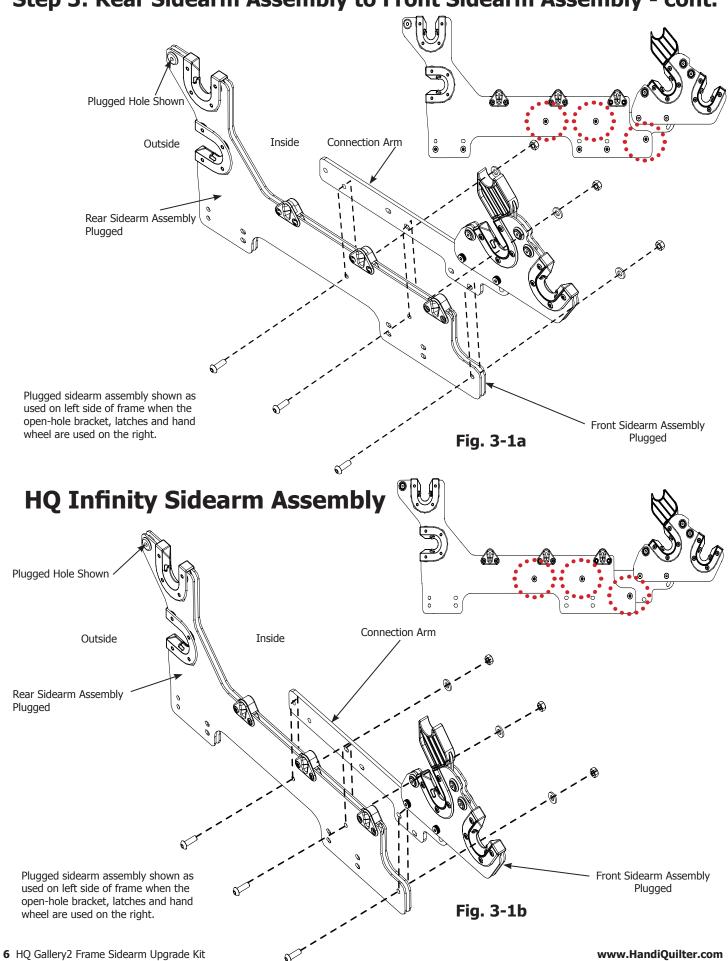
shows assembly for the HQ Infinity® 26-inch machine.
